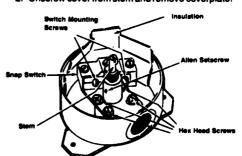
THERMOSTAT SWITCH REPLACEMENT.
